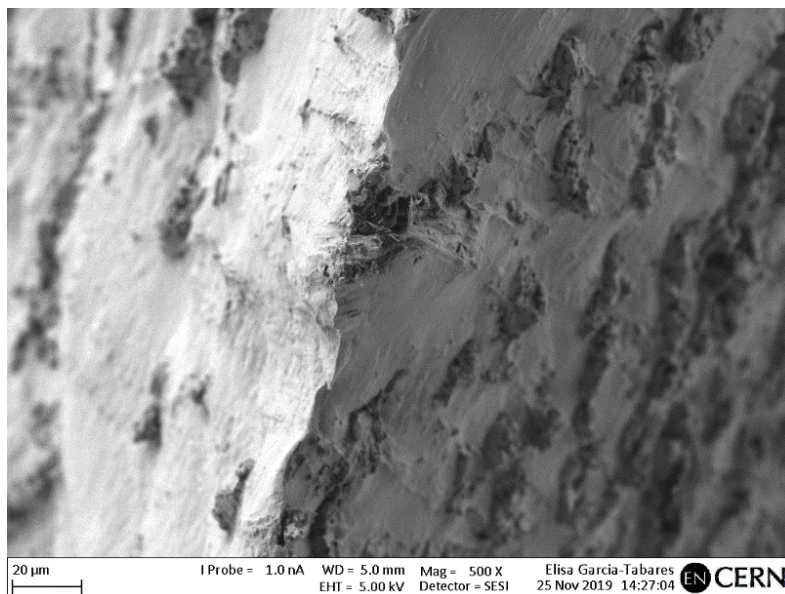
Fracture surface of specimen 4-99 SHTB showing a foreign particle in the chisel-edge.
